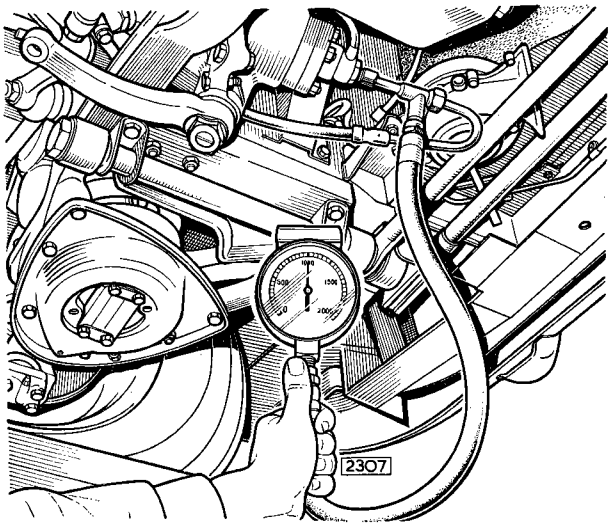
Checking the pressure with the gauge (Tool No. J.10)
